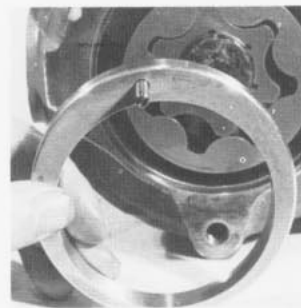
Remove Gerotor Ring and Pin (Earlier Units)
